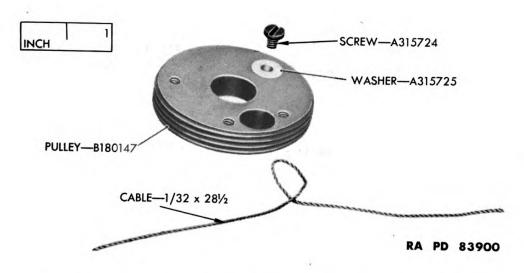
Cable and Clamping Screw Exploded From Small Pulley
